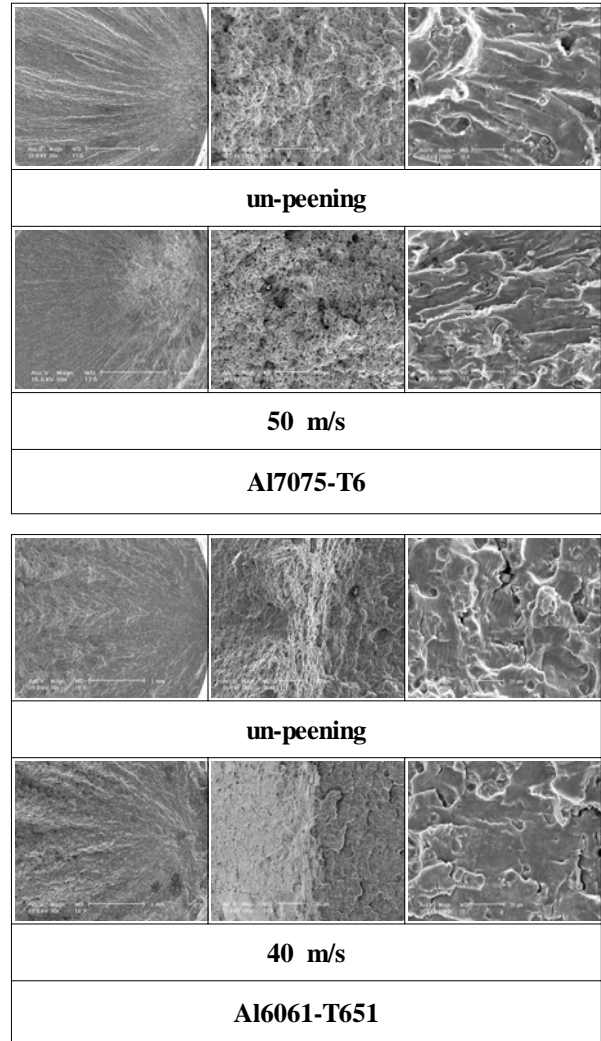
SEM fractography showing fracture surface by the Al7075-T6 and Al6061-T651 alloy
